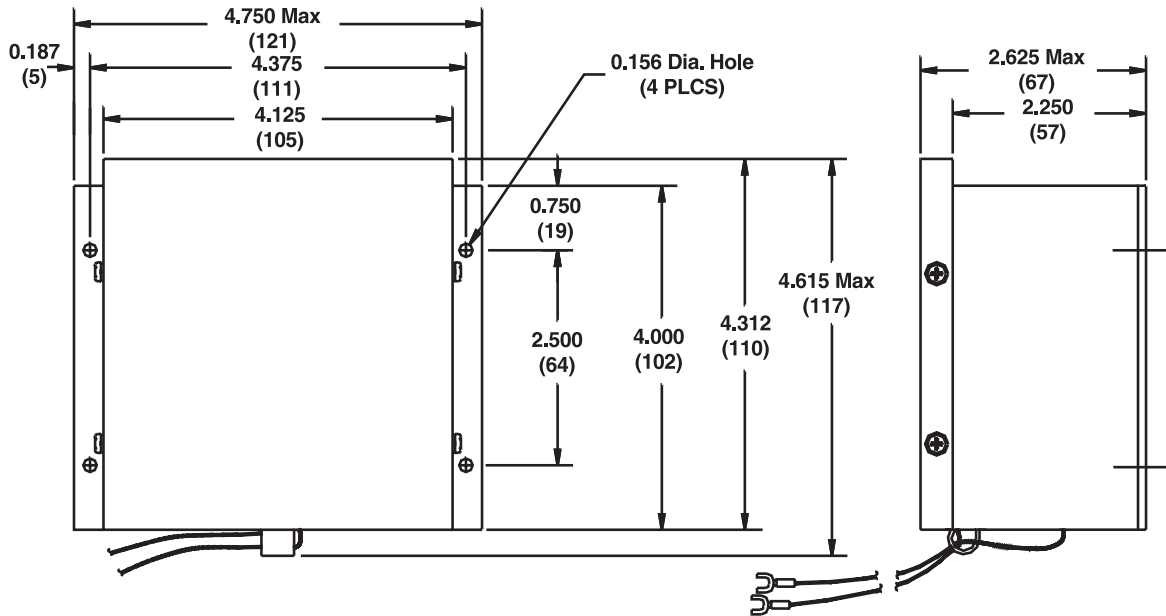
DIMENSION DRAWING, Suppression Chassis 9261500100/101
